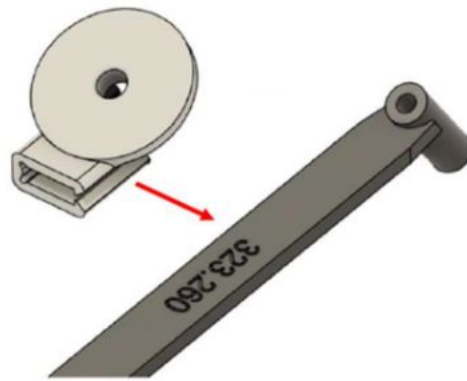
Drill guide with the reflector plate on which the tag will be placed [2].
